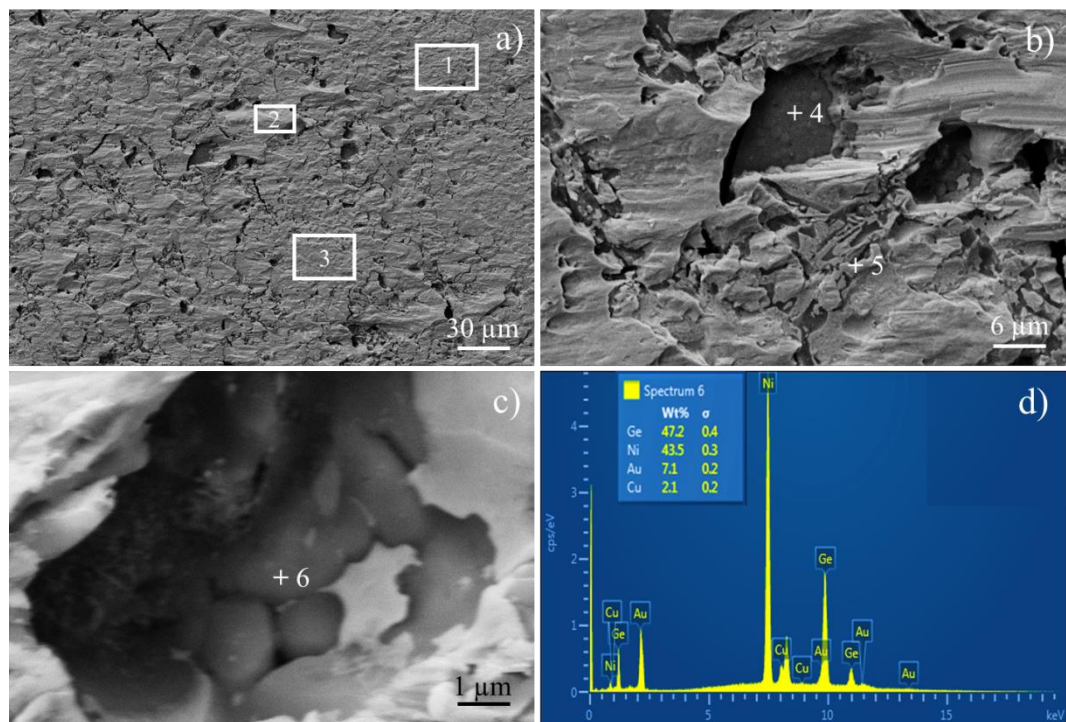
Typical fracture surface of the Au-Ge solder joints on substrate side: a) typical fracture surface; b) enlarged view of the dimples; c) NiGe grains; d) EDX spectrum of NiGe in c).
